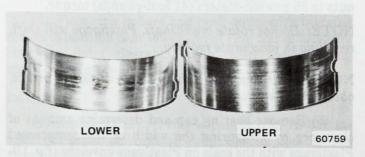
B-45 Scoring Caused by Insufficient Lubrication
